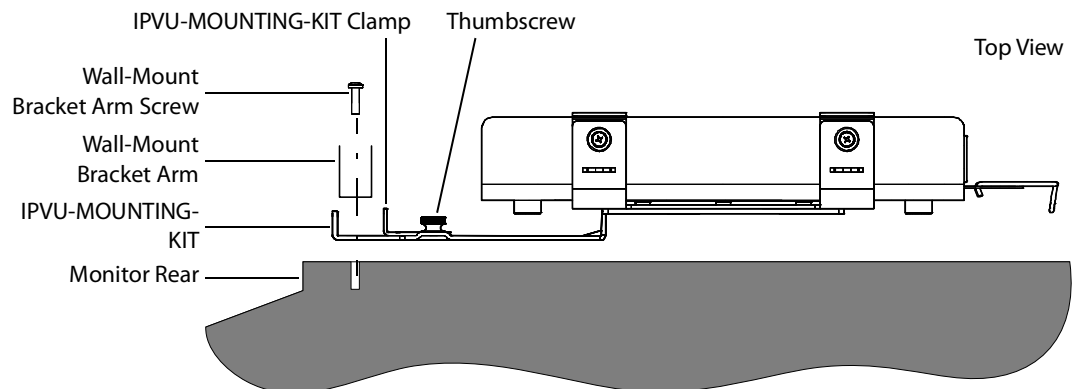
Assembly order of the IPVU-MOUNTING-KIT to the wall-mount bracket
